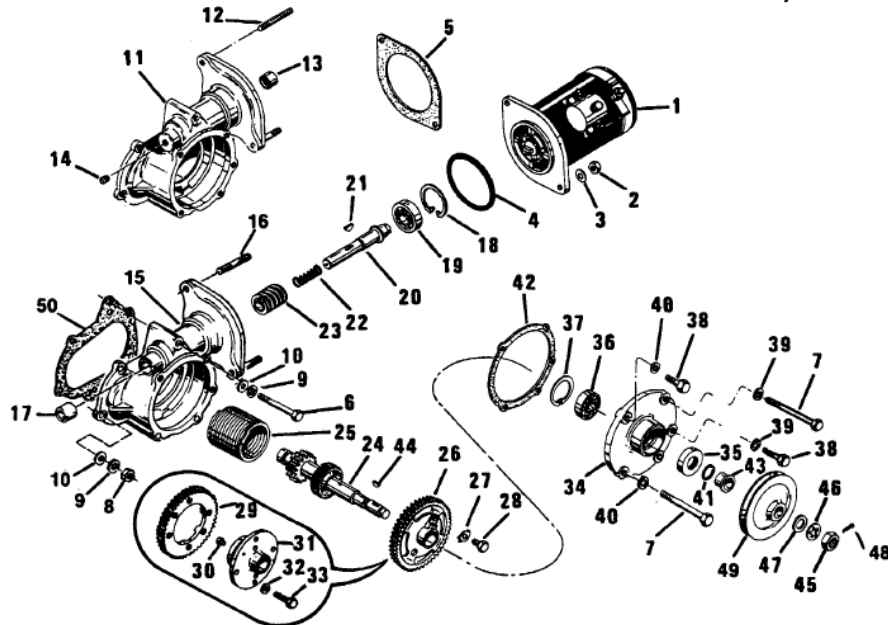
STARTER AND STARTER ADAPTER
